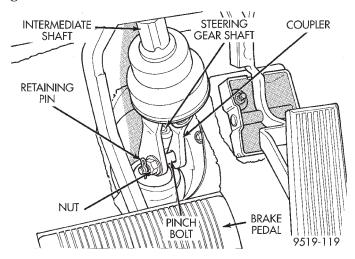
Intermediate Shaft Coupler To Steering Gear Shaft
